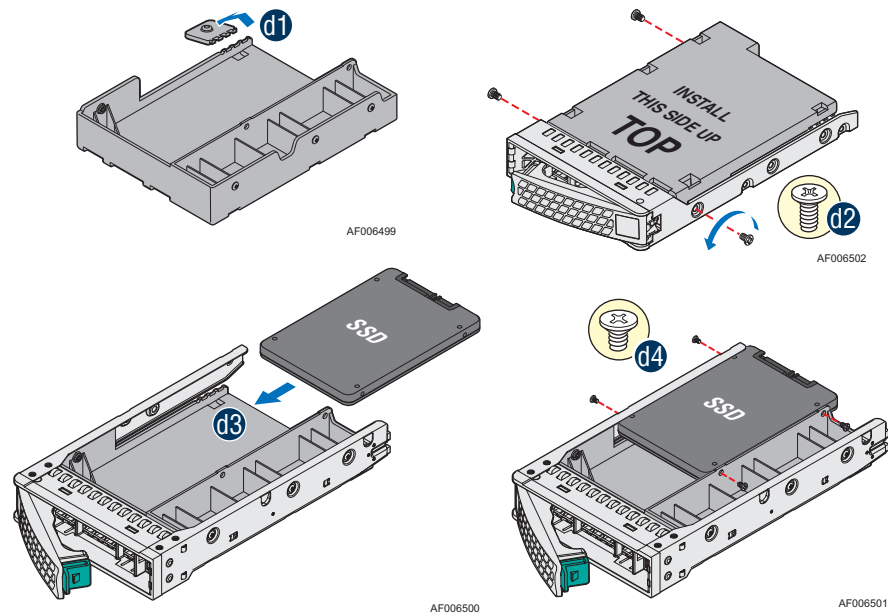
Option to Install the 2.5" SSD into a 3.5" Drive Blank
